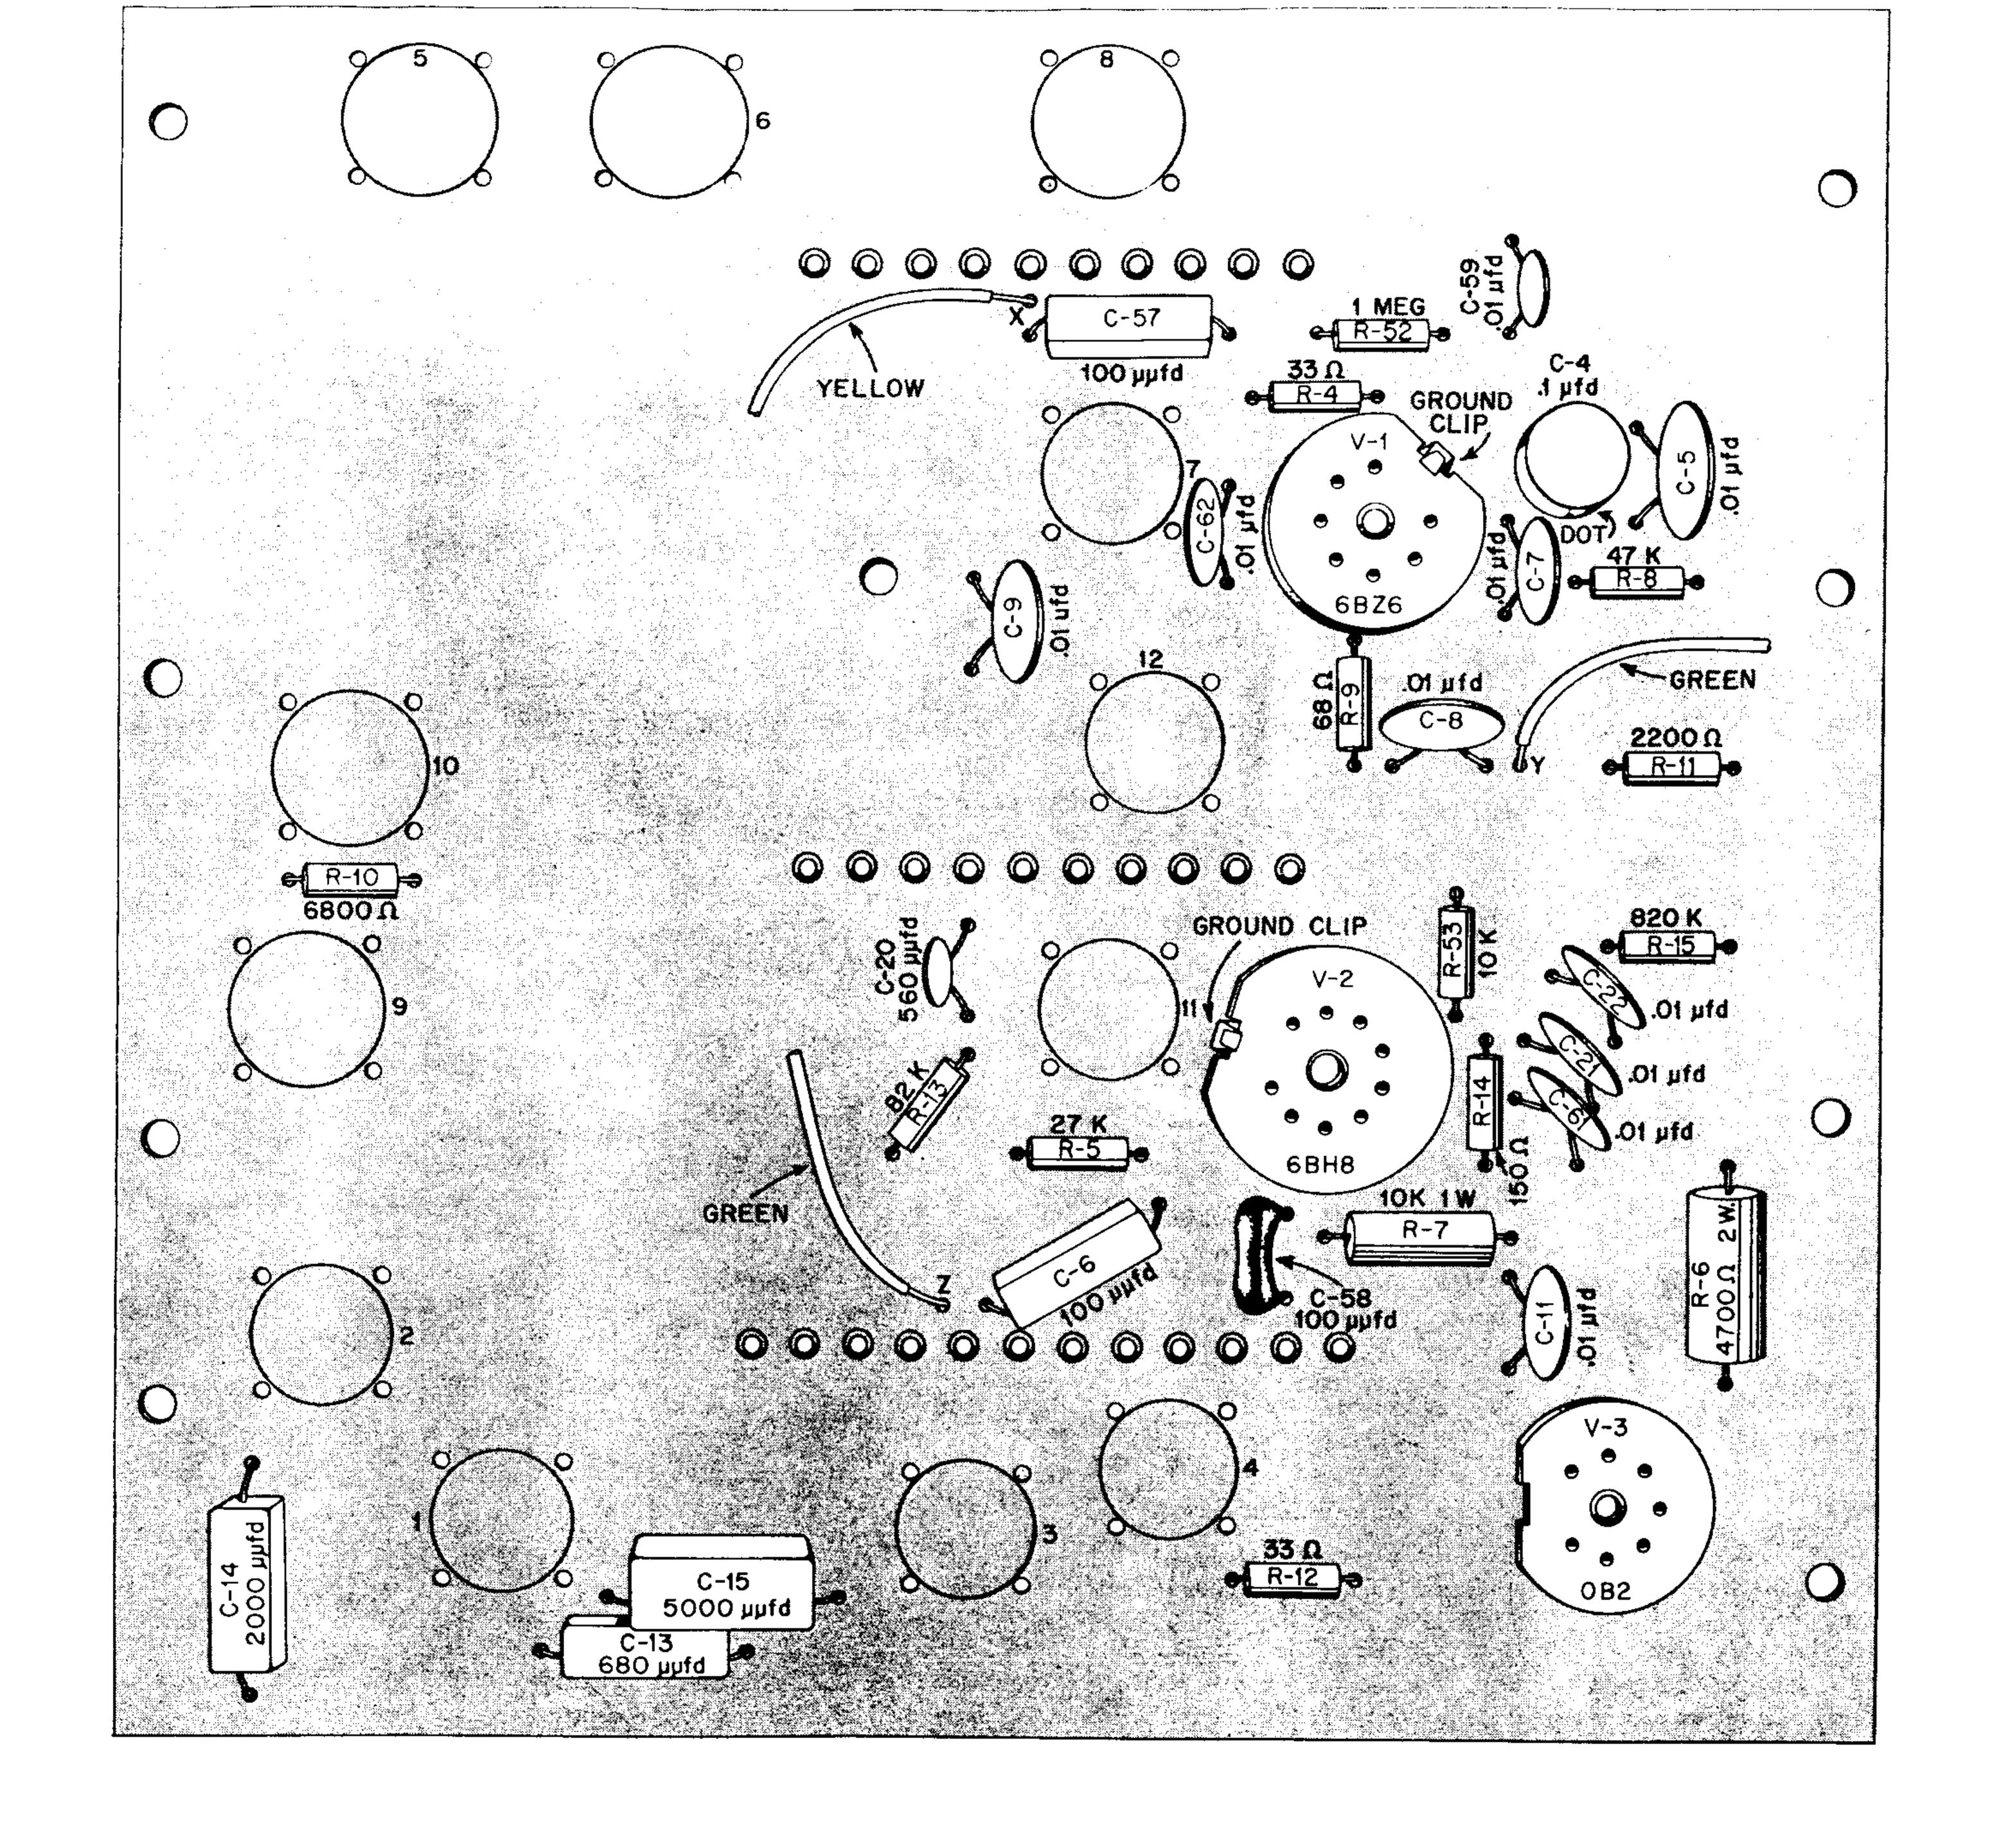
FIRST WIRING ON THE RF PRINTED CIRCUIT BOARD
